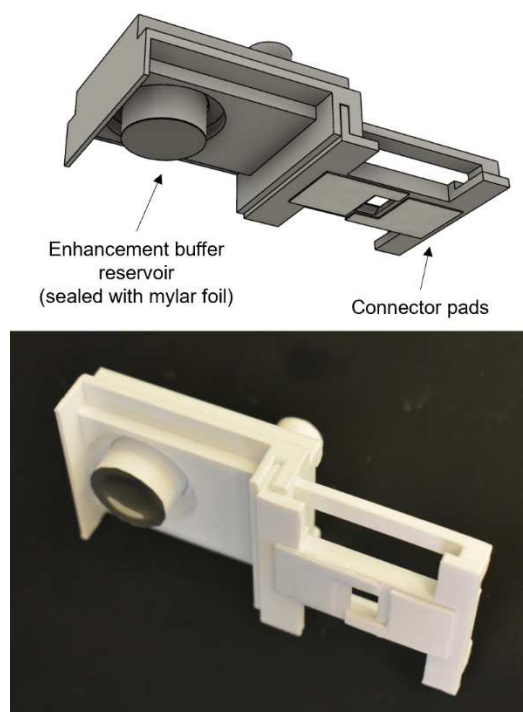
Overview of the middle piece of the casing. CAD drawing (top) and 3D printed piece (bottom) showing the underside view of the middle piece of the casing and the locations of the enhancement buffer fluid reservoir and the paper connector pads.
